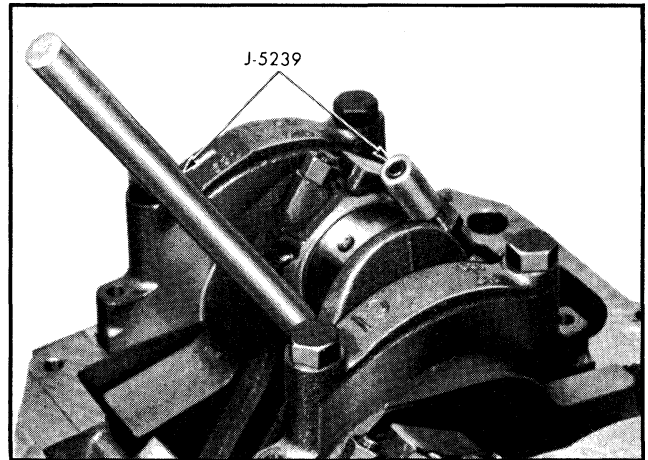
J-5239 Positioned for Removal of Rod Connecting Bearing Shell
